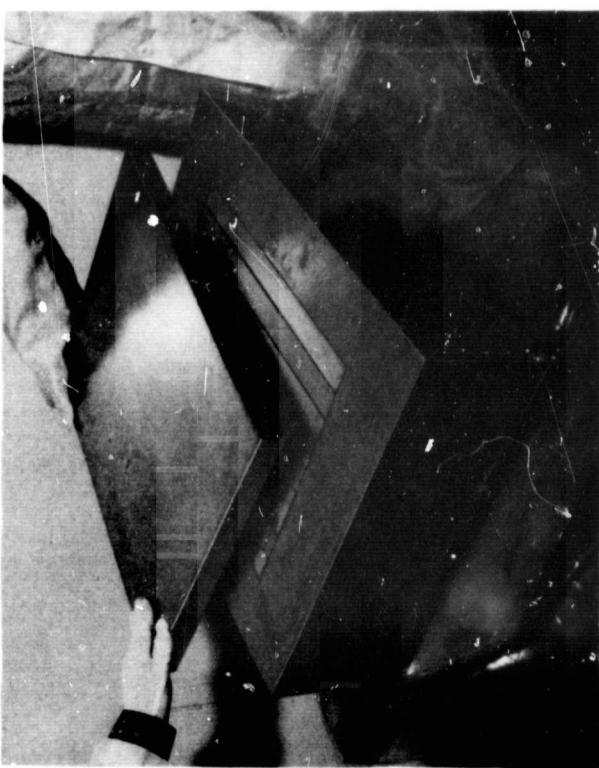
ASSEMBLY OF PACK, STEP 8
